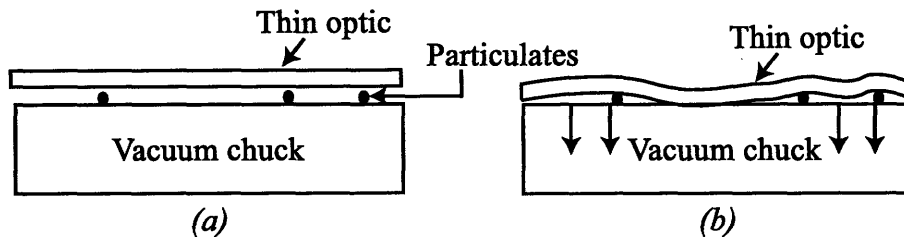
(a) A vacuum chuck with particulates on its surface. (b) Once the thin sheet is held against the chuck by vacuum, particulates are entrapped between the sheet and the chuck resulting in sheet surface warp.
